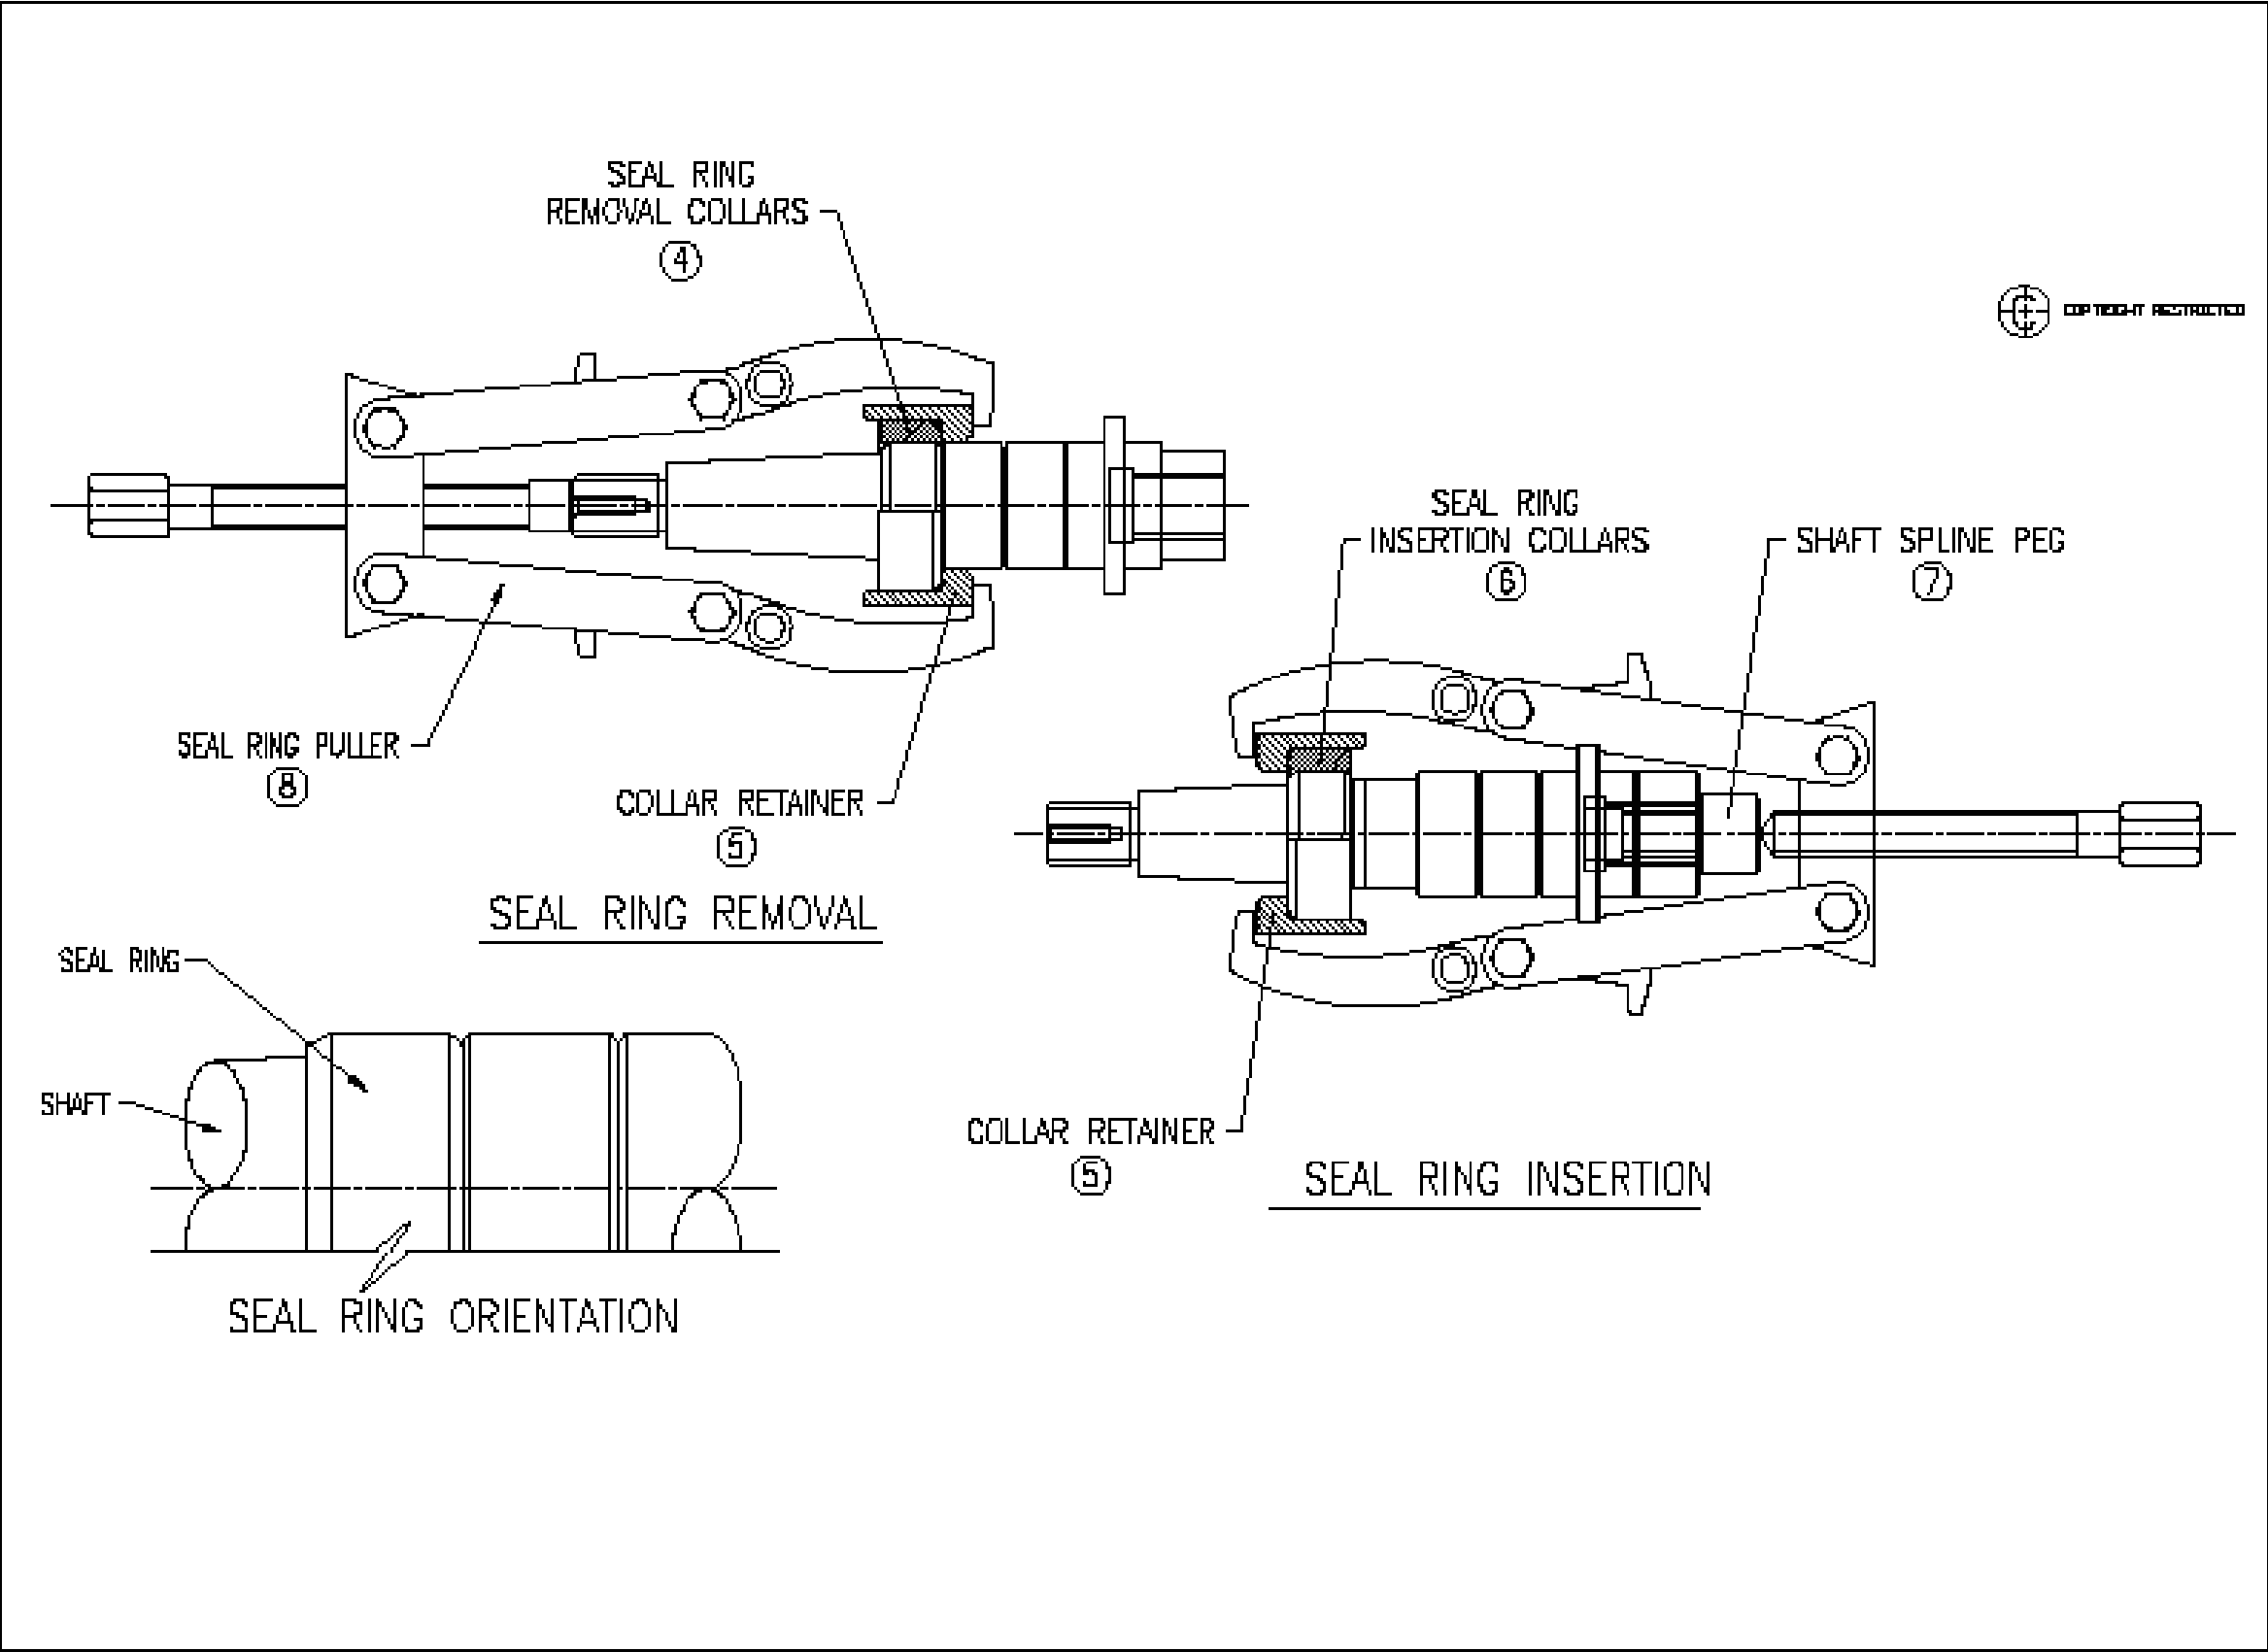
Curvetechn Thruster Seal Ring Removal & Replacement
